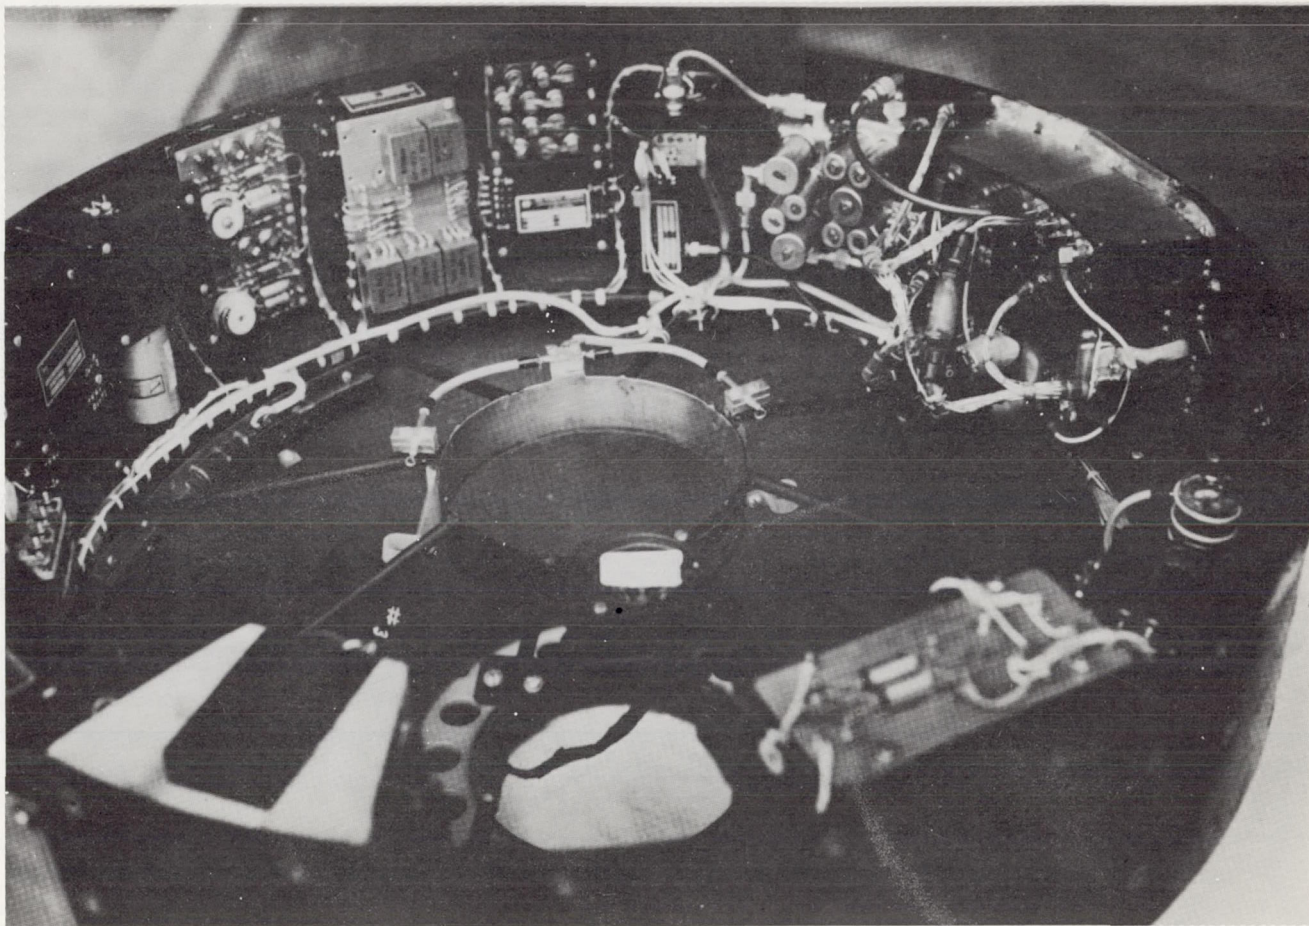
Payload Package Showing Stub Antenna Mounting and Wiring.
